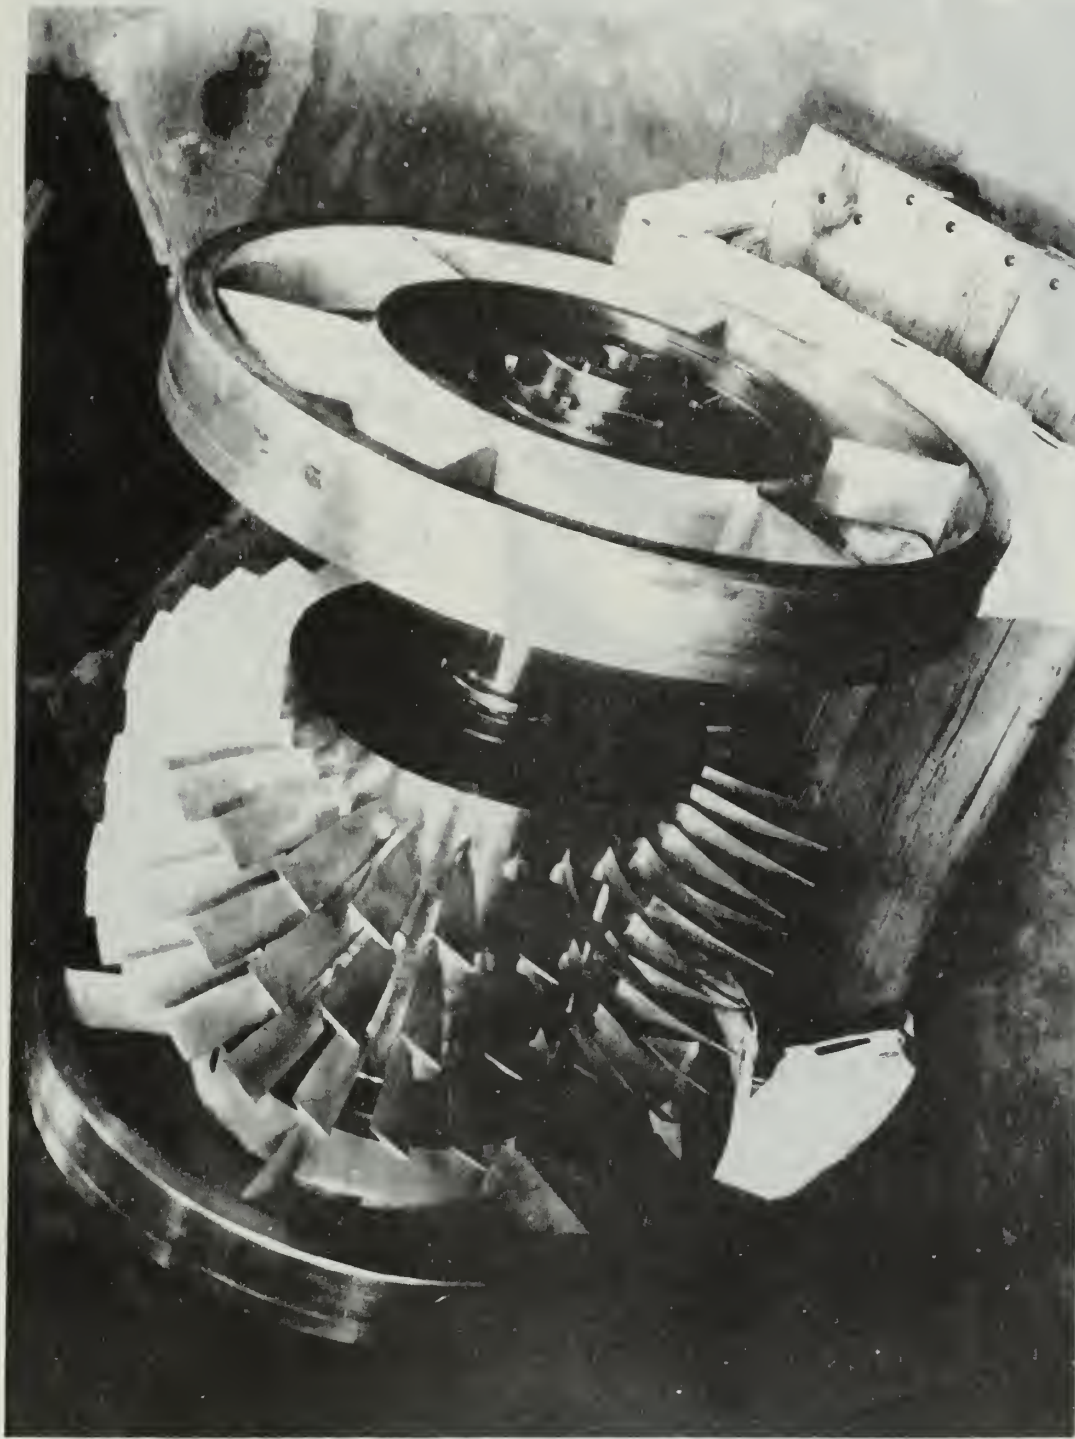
ROTOR BLADES, DRUM AND SHAFT MOUNTED IN SUPPORTING STRUT ASSEMBLIES
